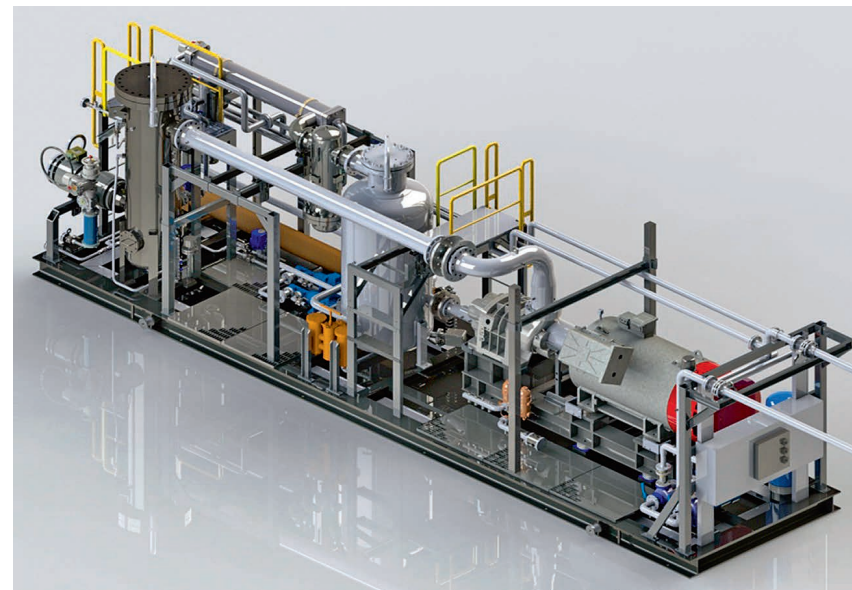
FIGURE. Layout drawing of the CU with filter-scrubber on the inlet gas line
